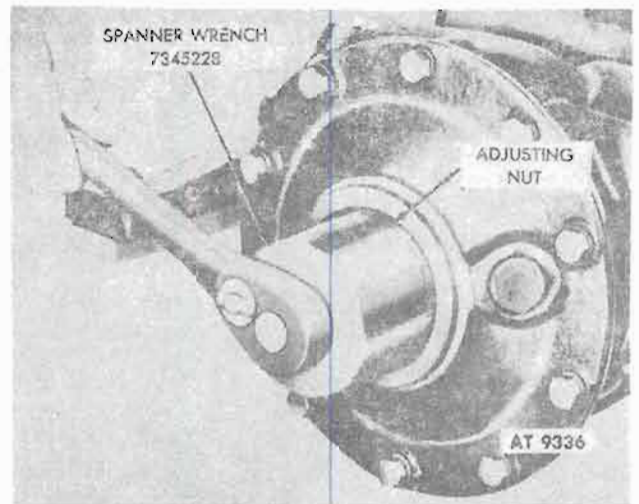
Using Spanner Wrench (7345228) to Loosen or Tighten Differential Bearing Adjusting Nuts.
